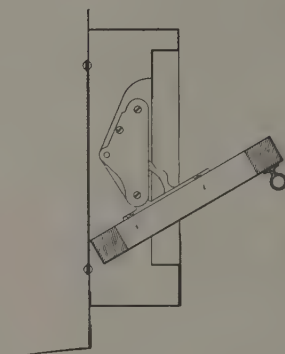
Fresh Air Intake, Cross Section of Steel Car. Vapor Car Heating Company.
